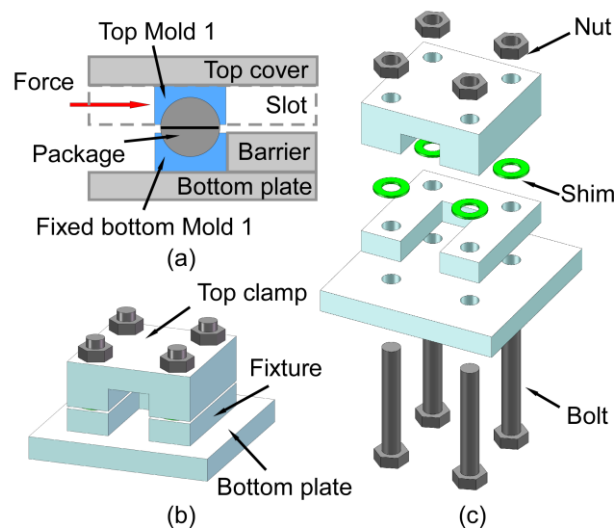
(a) 2D conceptual diagram of the working plate for shear stress test. (b) Three main parts of the working plate: top clamp, fixture and bottom plate. (c) The exploded view of the working plate, the main structures are assembled by bolts, shims, and nuts. These illustrations are conceptual and not to scale.
